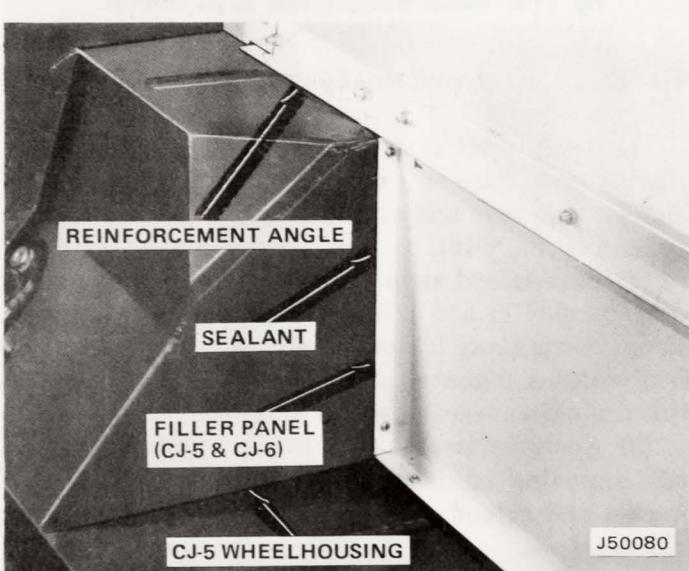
Filler Panel and Reinforcement Angle Installed
